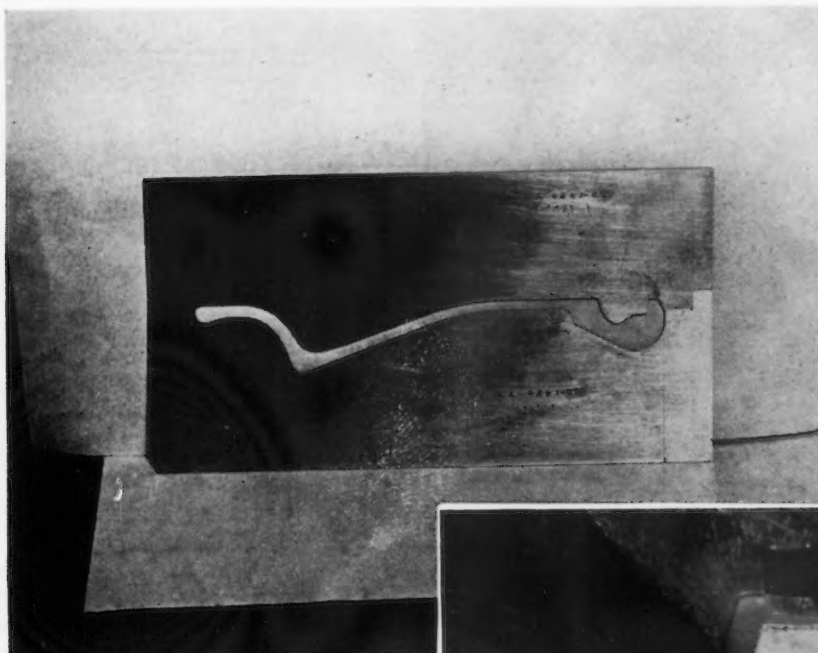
Master templates for gaging each side of the shape are among the special tools used in the manufacture of motor vehicle rims.
